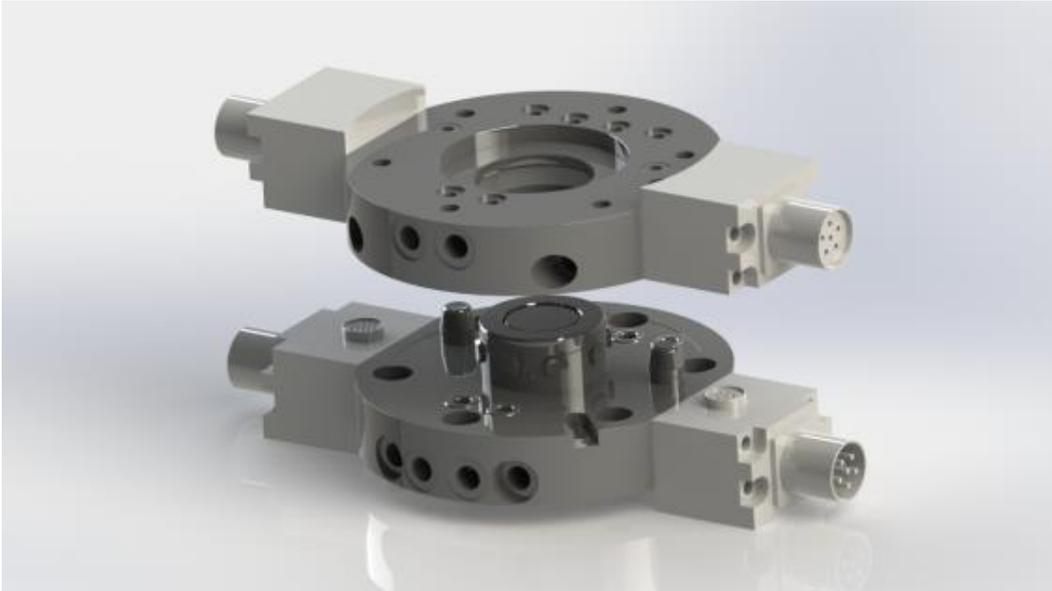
Robotic connector used for electrical power, signal and compressed air. Top part is attached to mechanical gripper and bottom part to container top.
